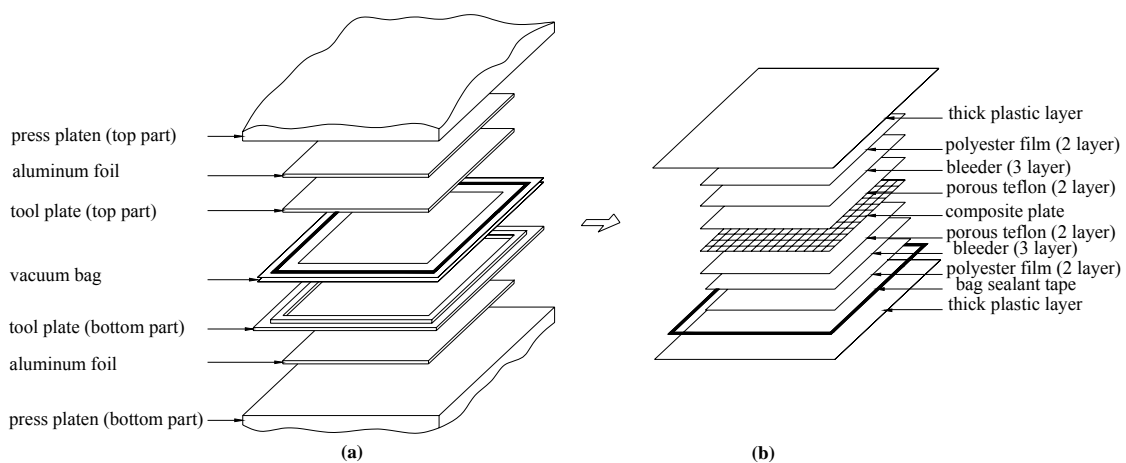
(a) Detail view of tool plate designed, (b) vacuum bag preparation for curing of the composite plate
